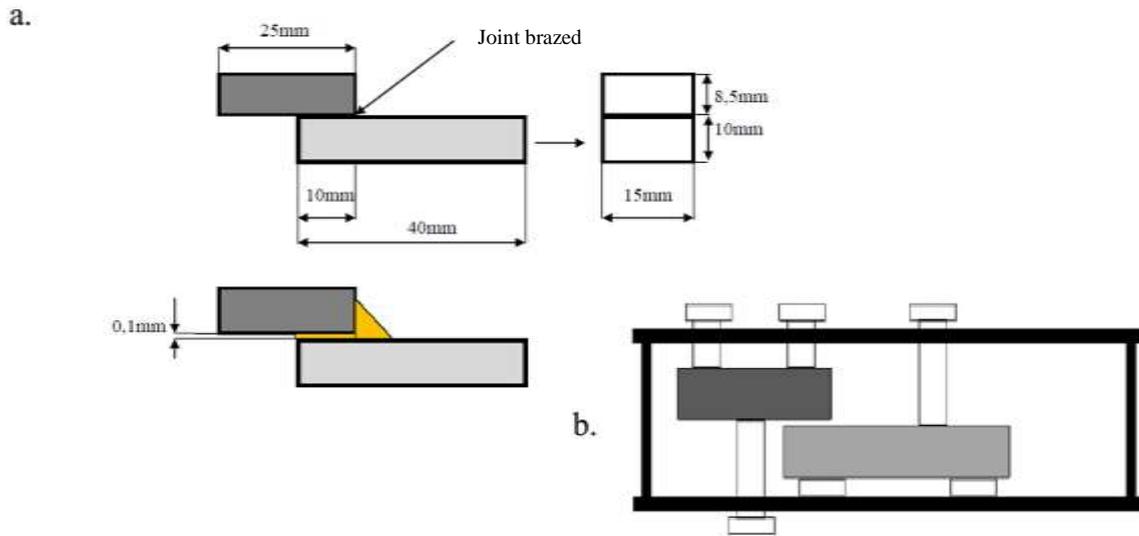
(a) Schematic and types of joints, and (b) Jig (fixture)
